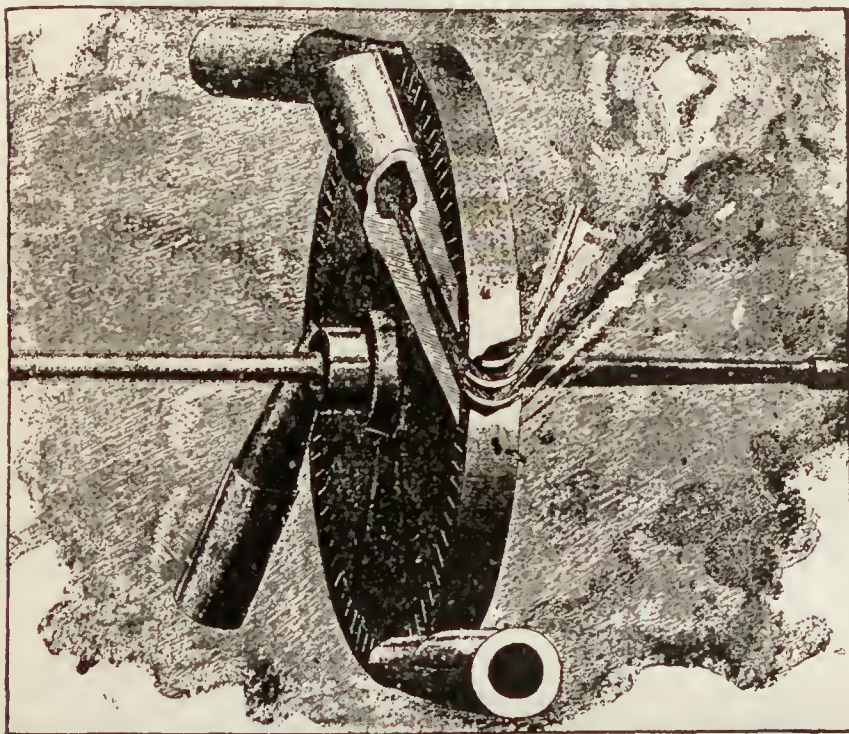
PERSPECTIVE VIEW OF THE TURBINE WITH BUCKETS SHOWING THE PASSAGES FOR THE ADMISSION OF STEAM.
